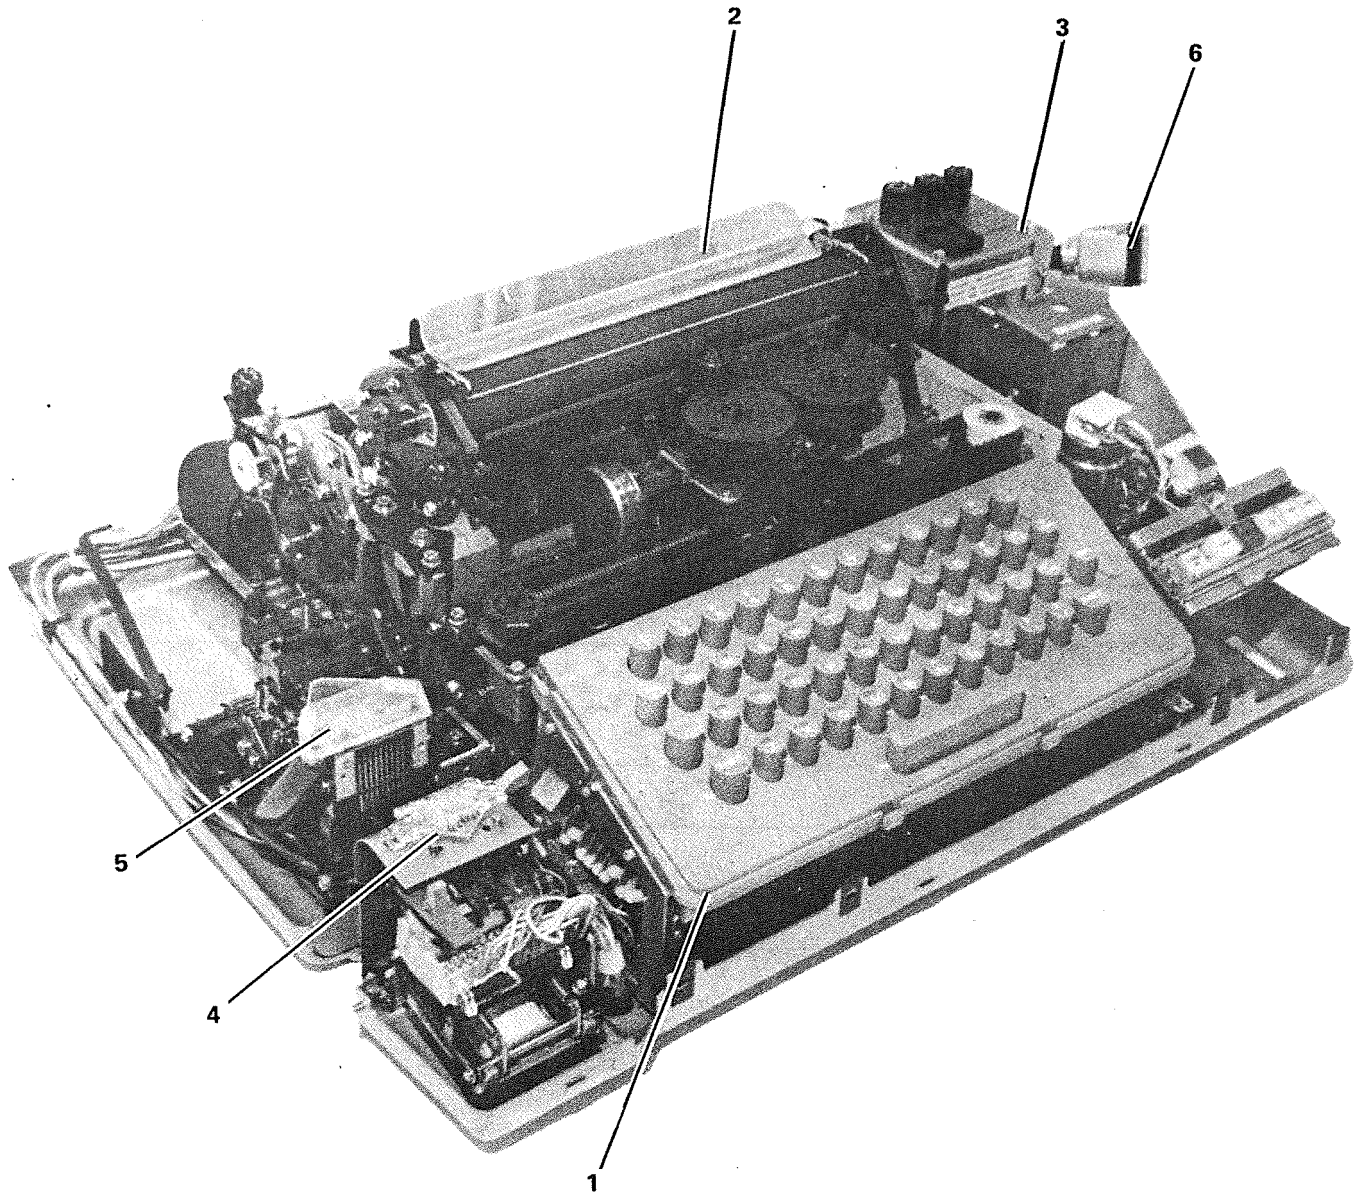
A. 5028 OPERATOR STATION ASSEMBLY. SEE LIST 2A.
